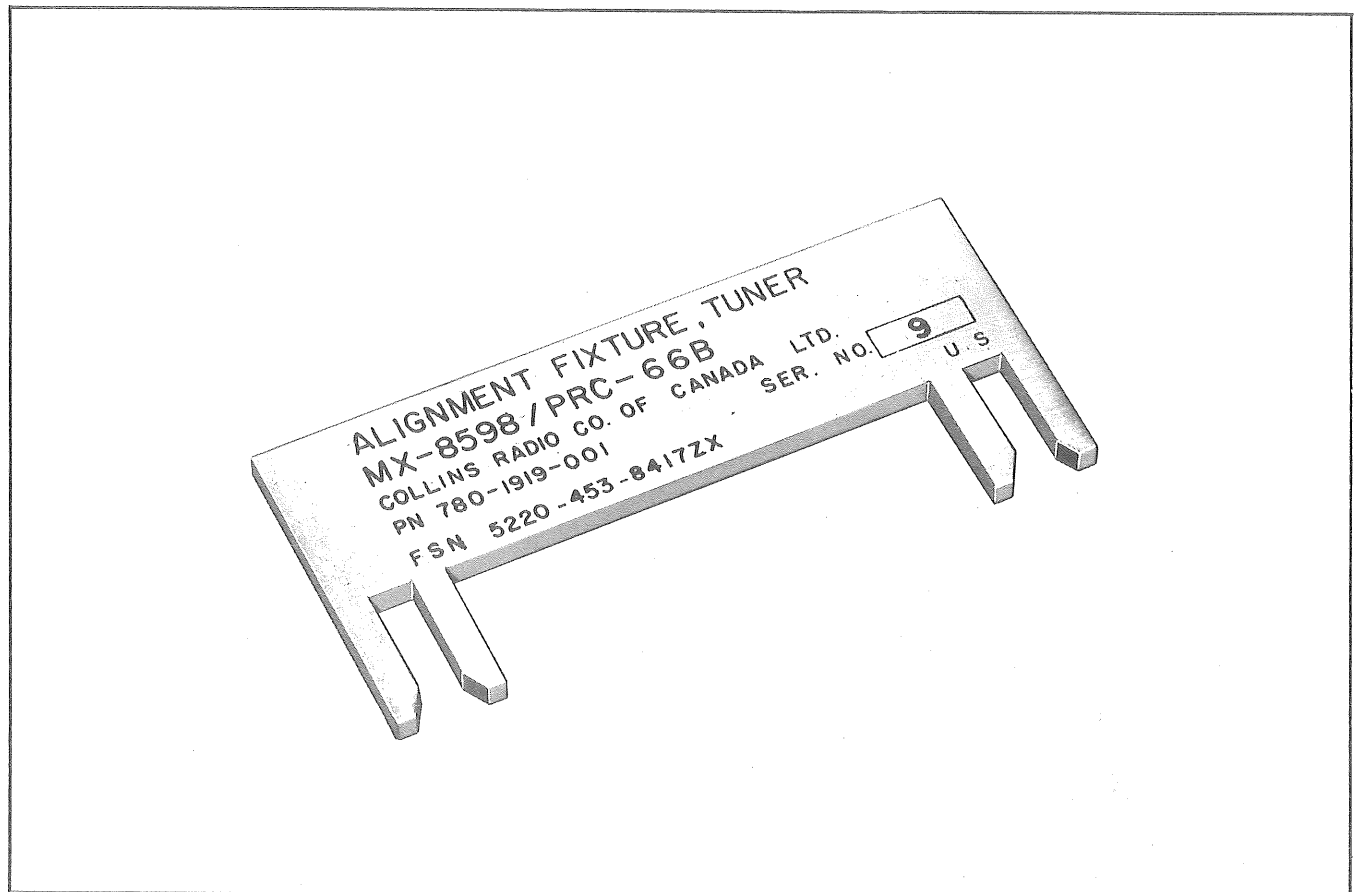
Alignment Fixture, Tuner MX-8598/PRC-66B
